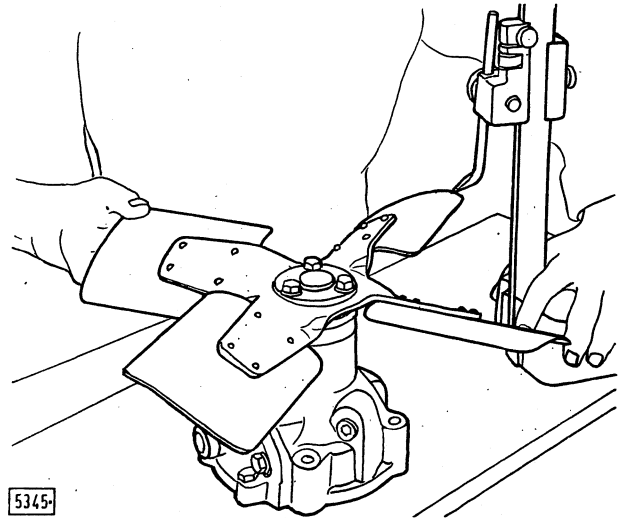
Checking the fan blade face alignment with a surface gauge.
